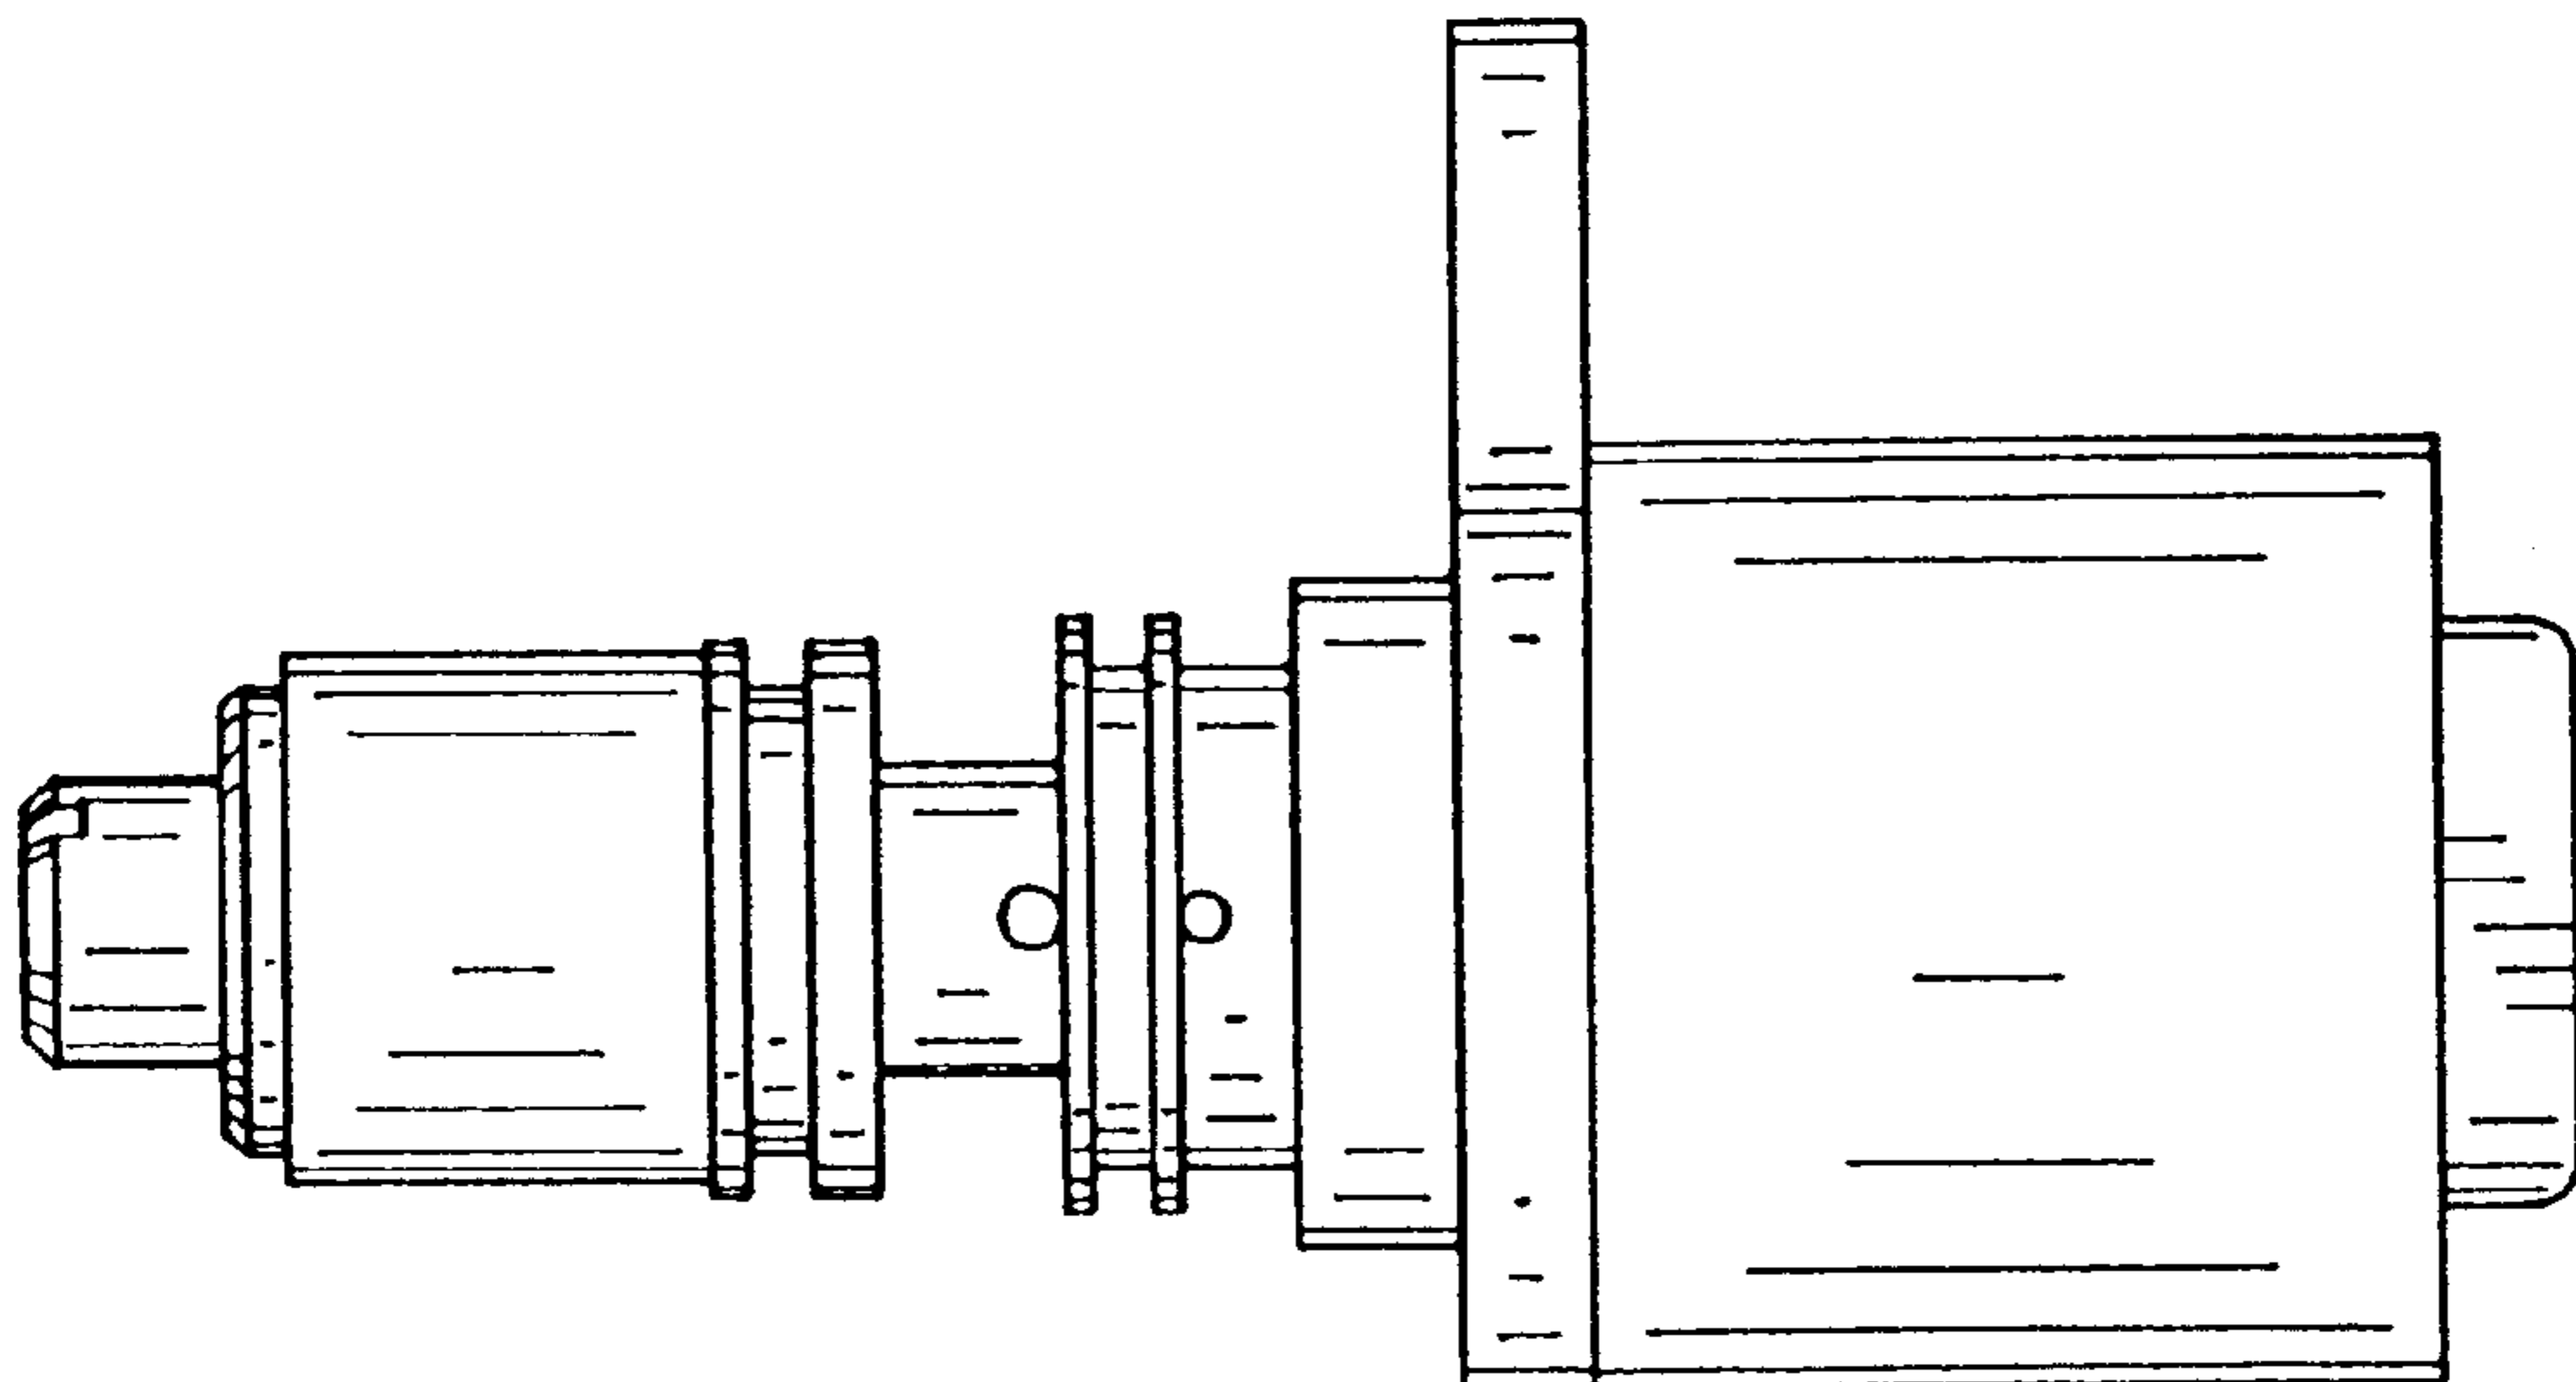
is a bottom plan view of the compressor including an electromagnetic control valve for a compressor, as shown in FIG. 1.
